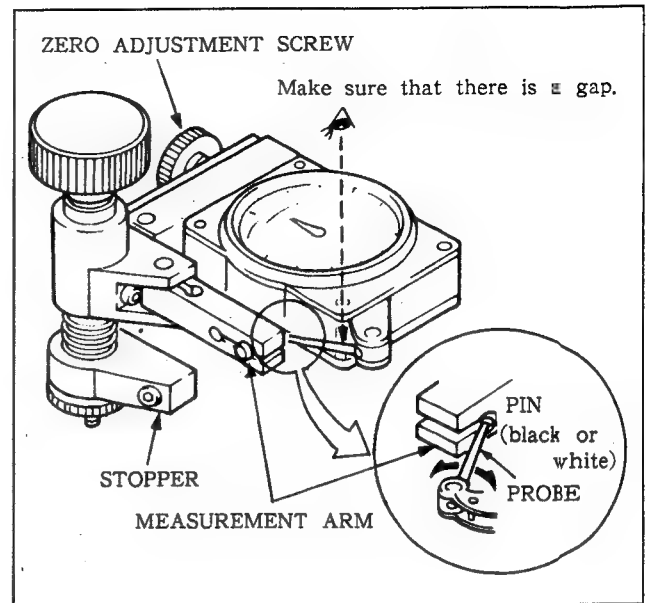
Upper Drum Eccentricity Adjustment Gauge
